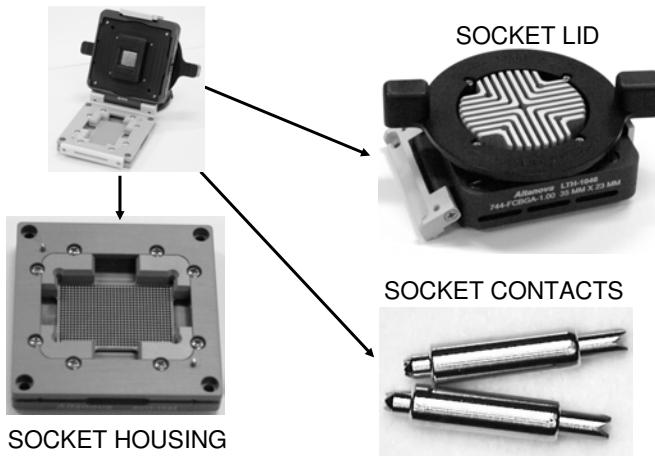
Breakup of a typical socket into its individual parts (courtesy of Altanova).
